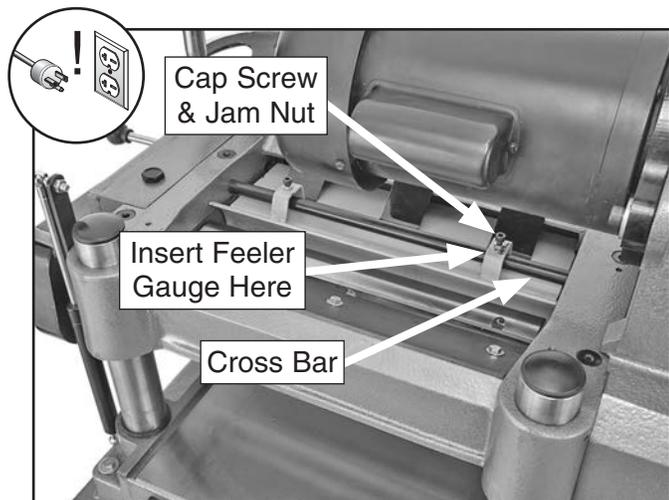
Feeler gauge location for adjusting infeed roller height when using wood blocks.
